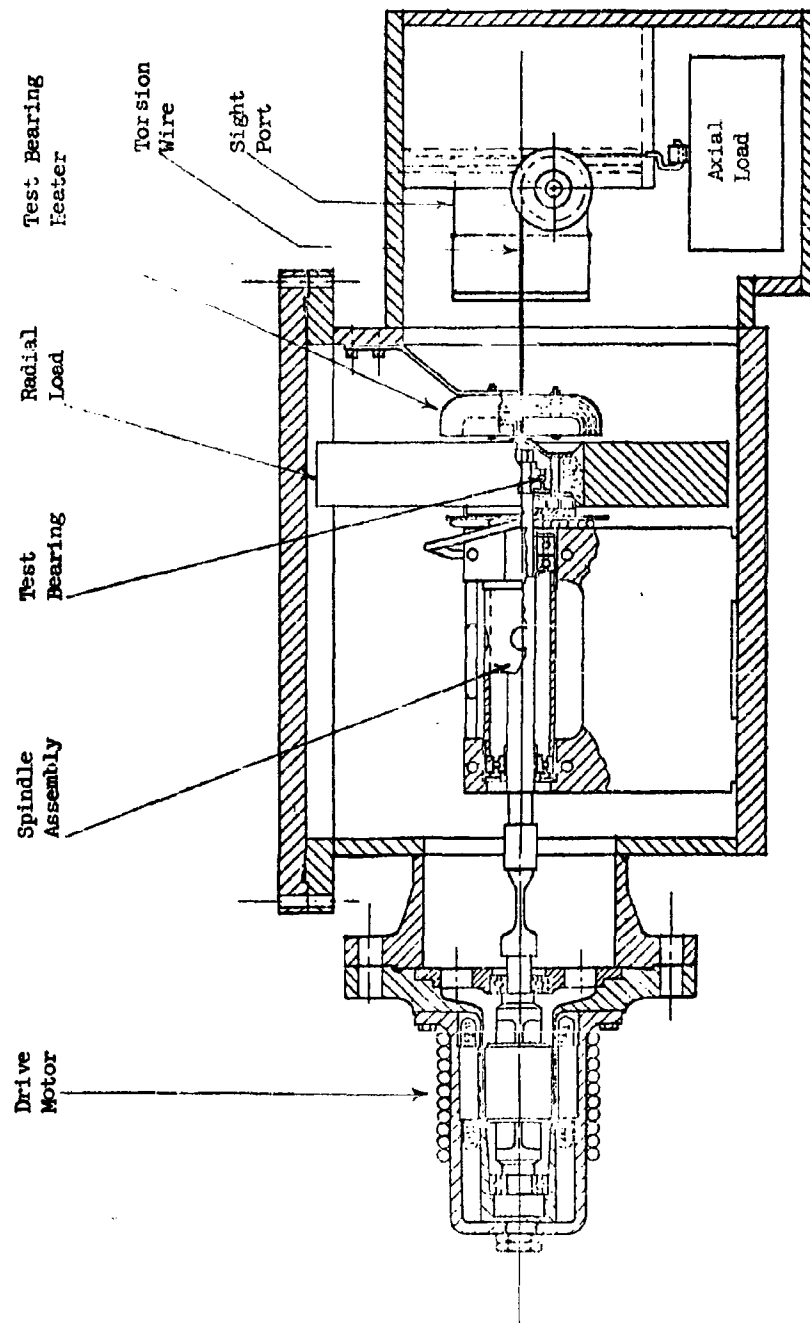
CROSS-SECTIONAL VIEW OF ULTRA-HIGH VACUUM BEARING TESTER
